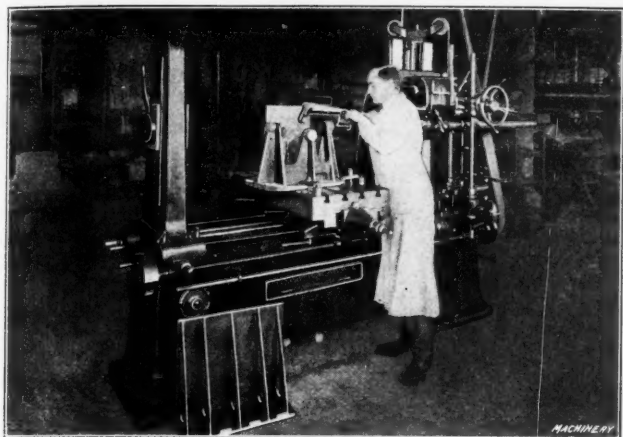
Locating the Spindle laterally for Boring a Fixture
